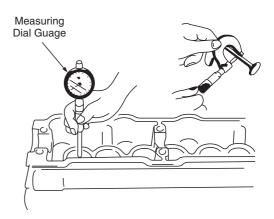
Measuring Valve Stem Diameter and Valve Guide Internal Diameter
